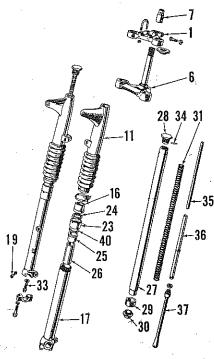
Exploded view of T20S and T20T front suspension unit. Stem (6) rides on 1/4 in. diameter bearings. Fifteen are used in each race.
